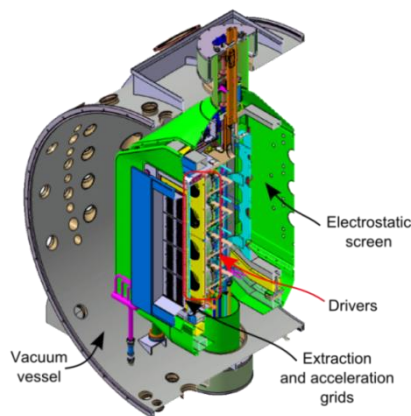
Cut view of the SPIDER vacuum vessel and internal components.
